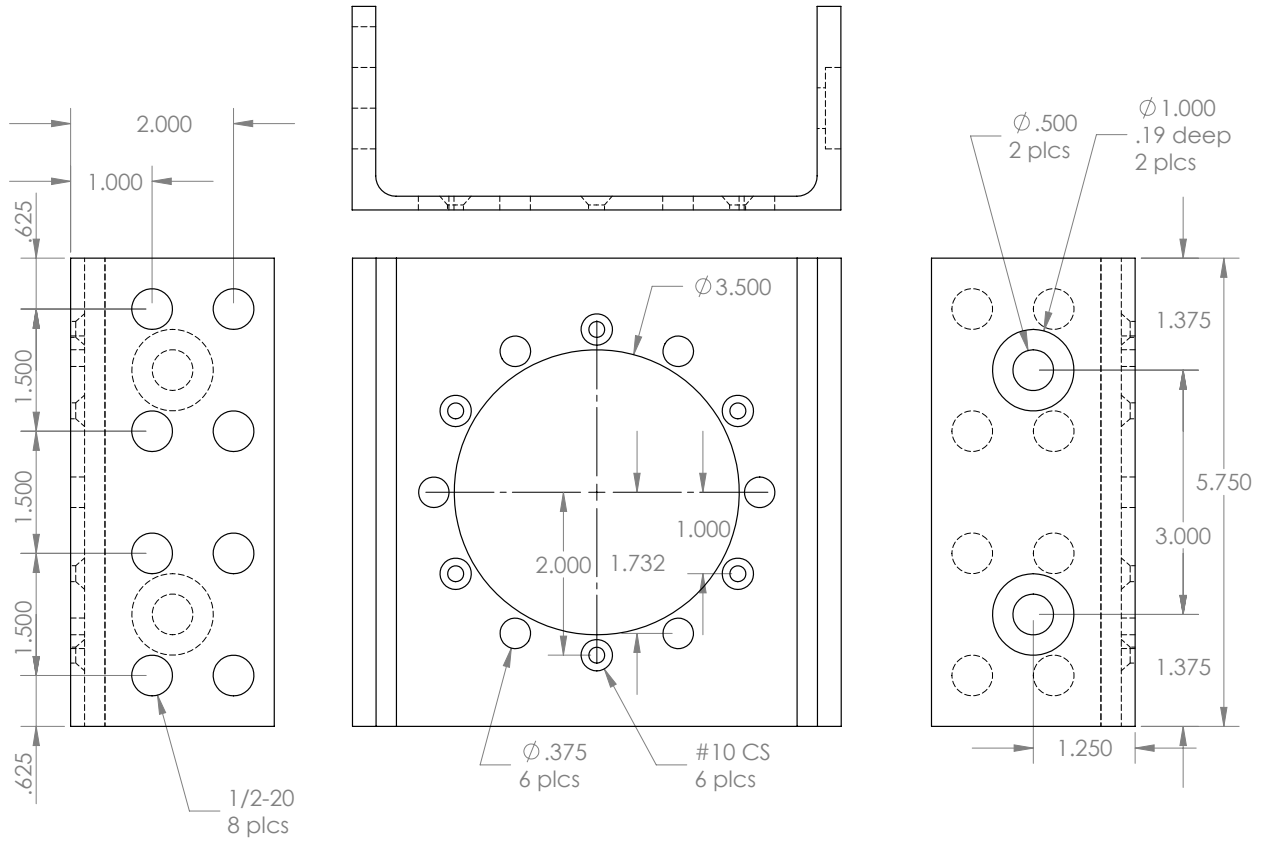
The drawing of the RF probe base component made of aluminum U-channel. Dimensions are mixed in inches.
